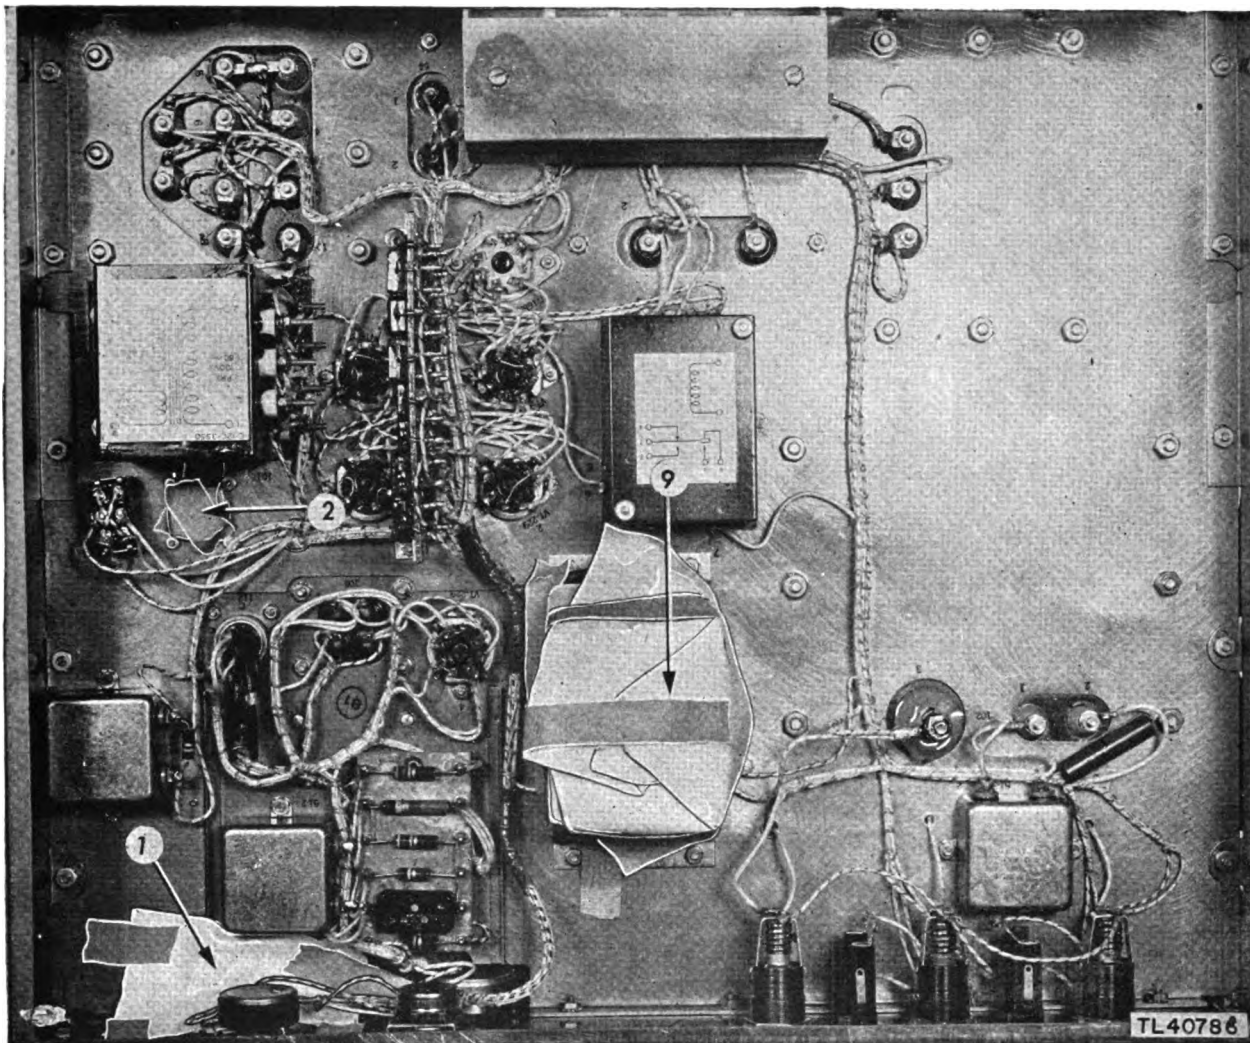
Indicator I-221-A—bottom view showing masked parts.
